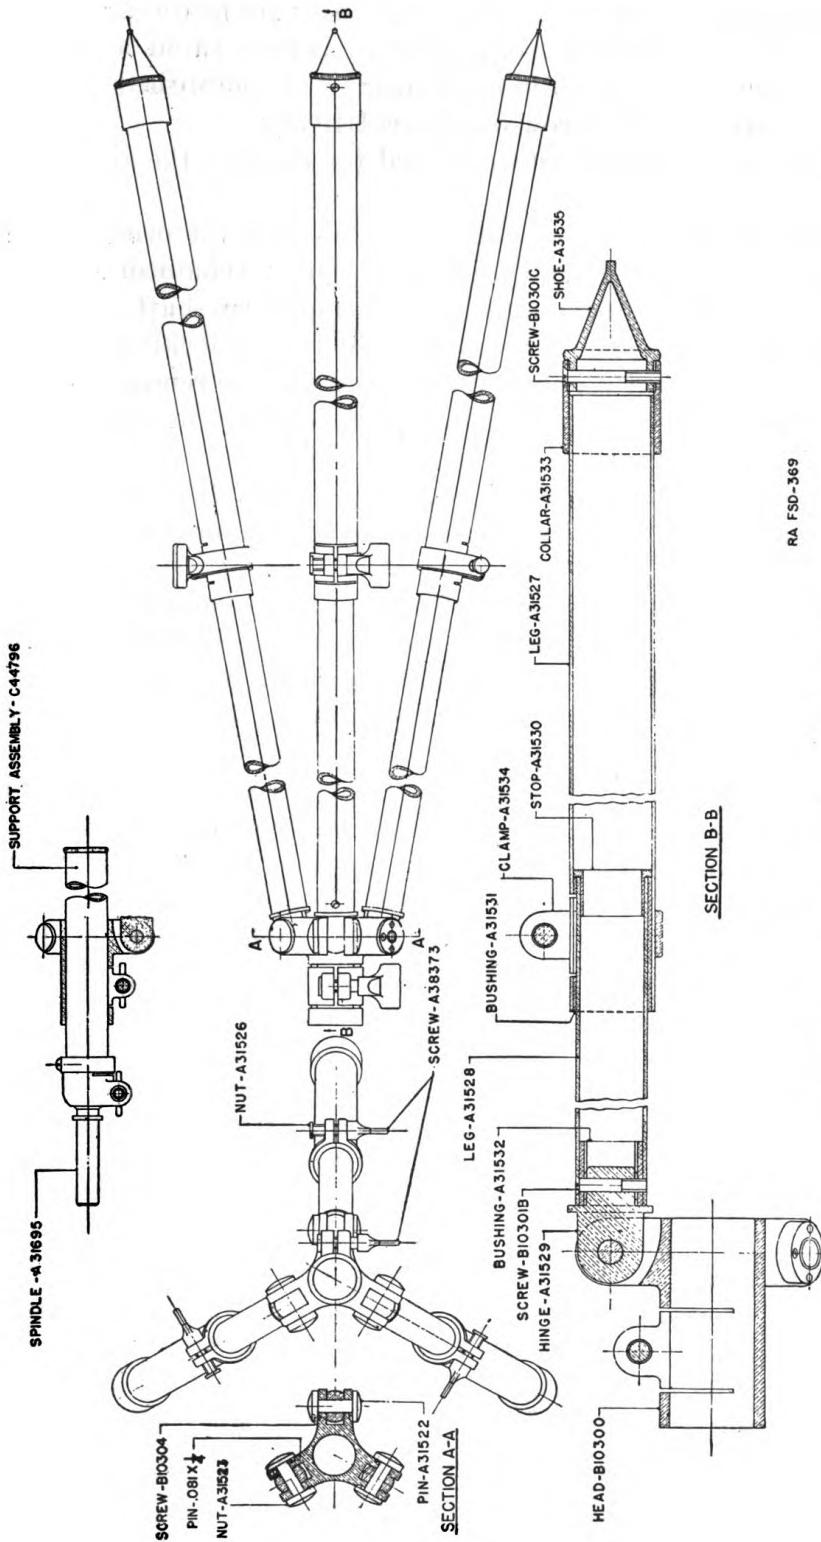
Tripod, type Y—assembled and sectioned views.
